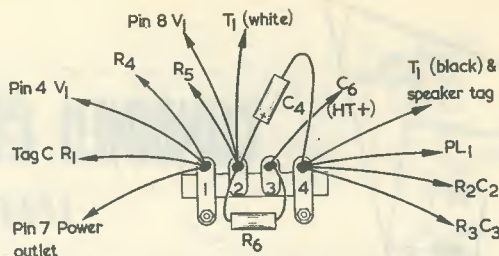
Wiring details of the 4-way tagstrip. Note that both tags 1 and 4 should be bolted to the chassis
